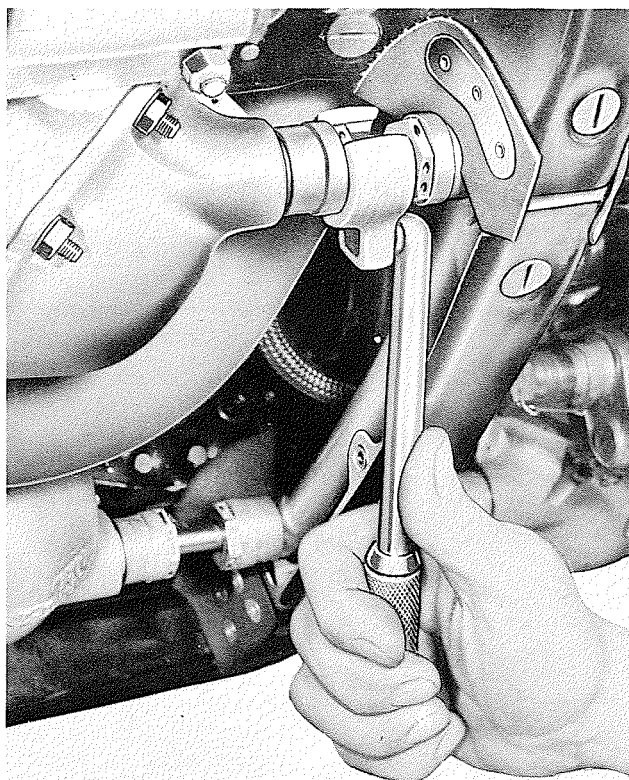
Loosening Rocker Box to Drain Manifold Tube Nut
